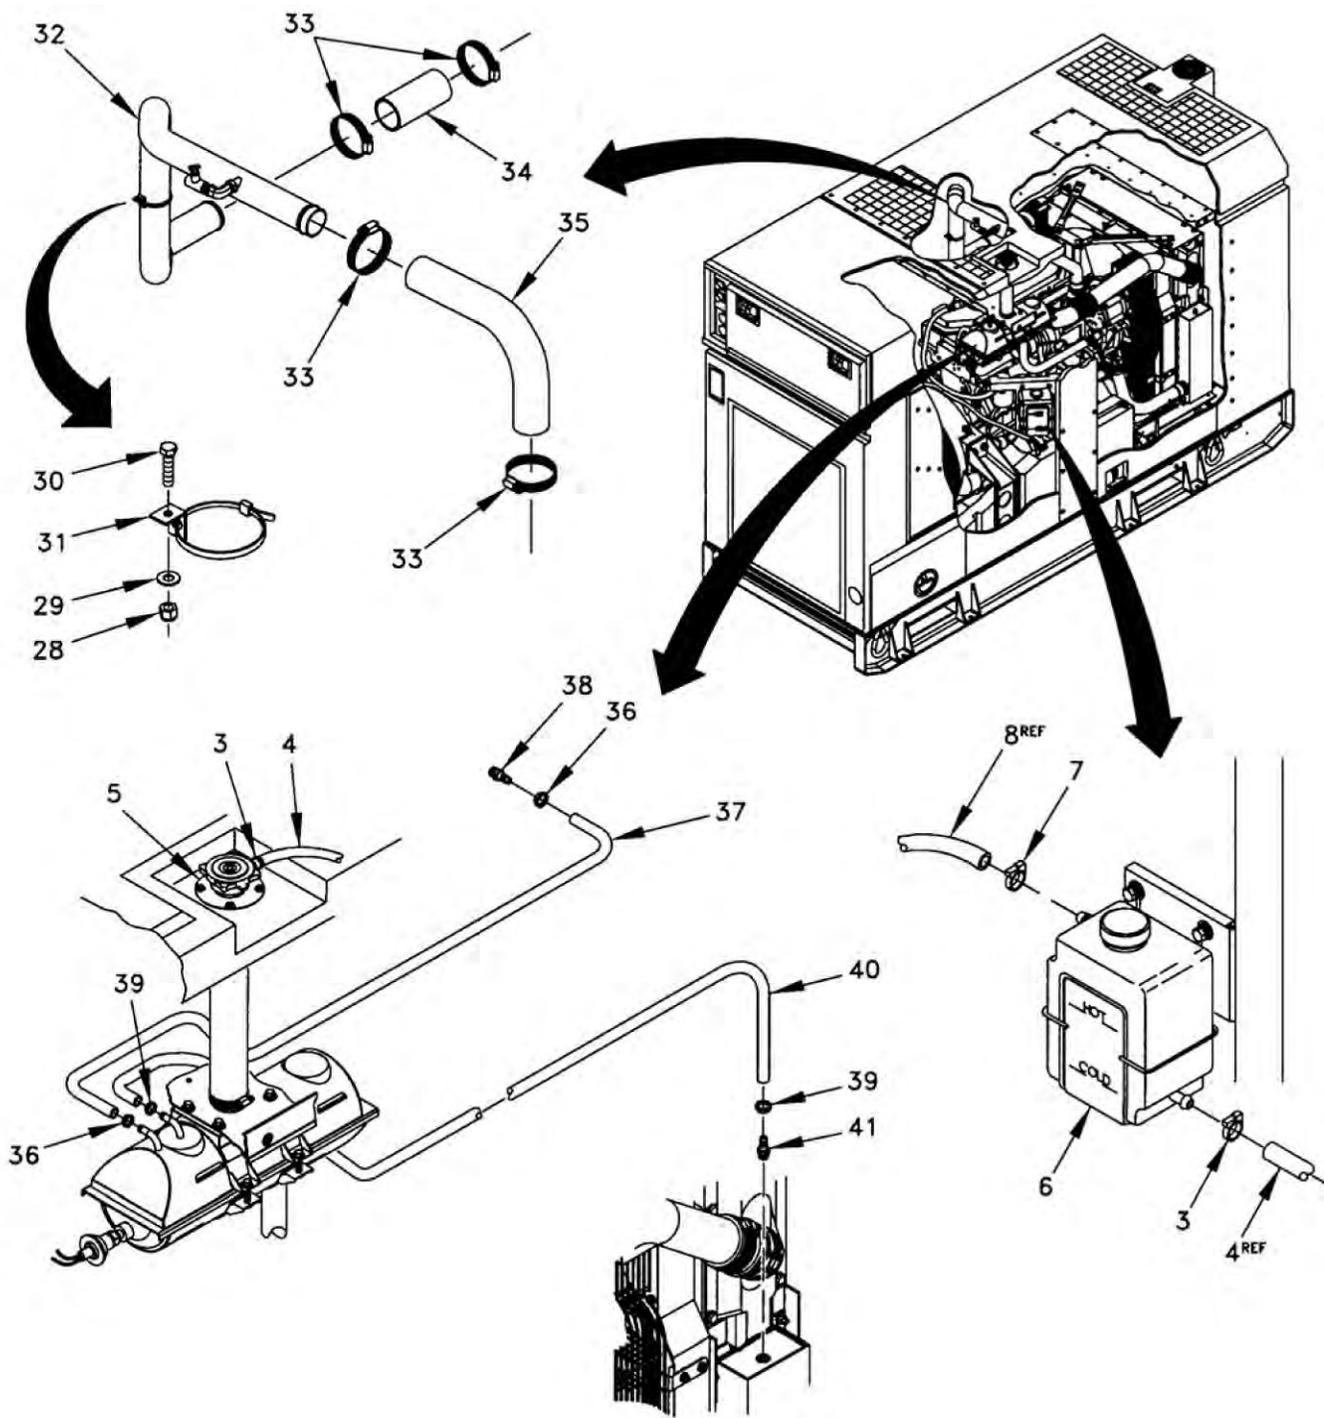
Coolant Hose Assemblies (Sheet 2 of 2).
